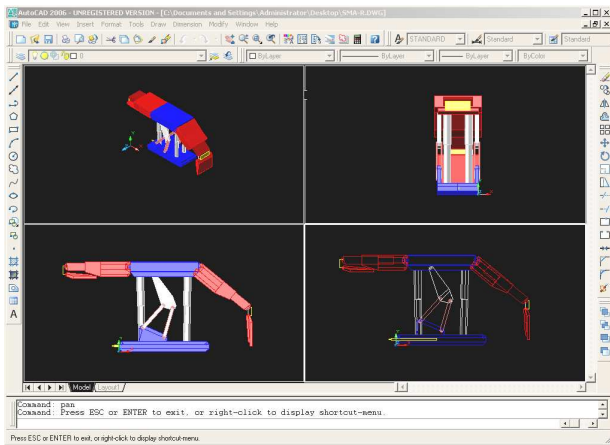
CAD based analysis of the pantograph mechanism.
